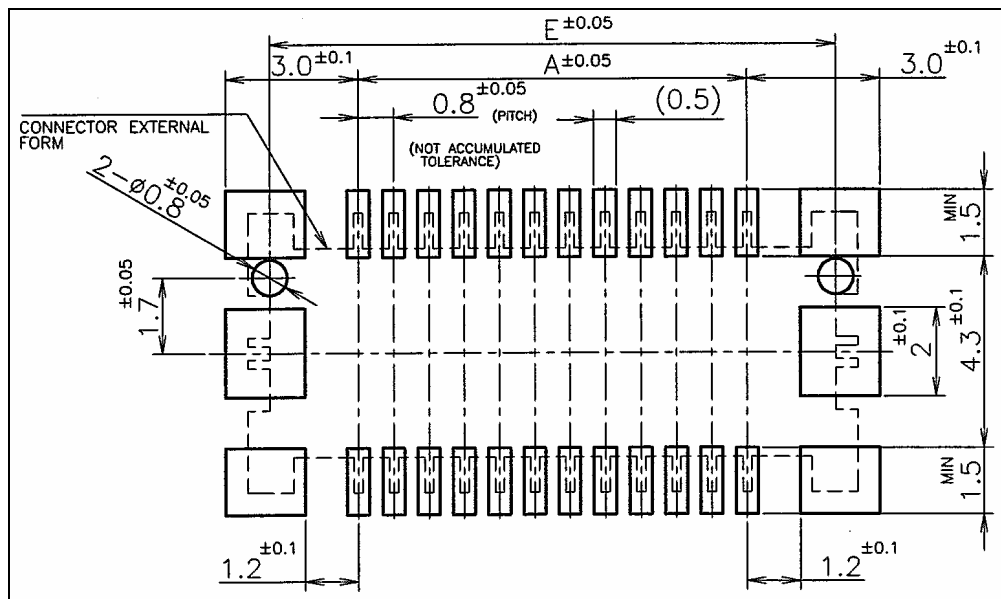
Receptacle Sub Assembly Tyco PN 1-179397-2
